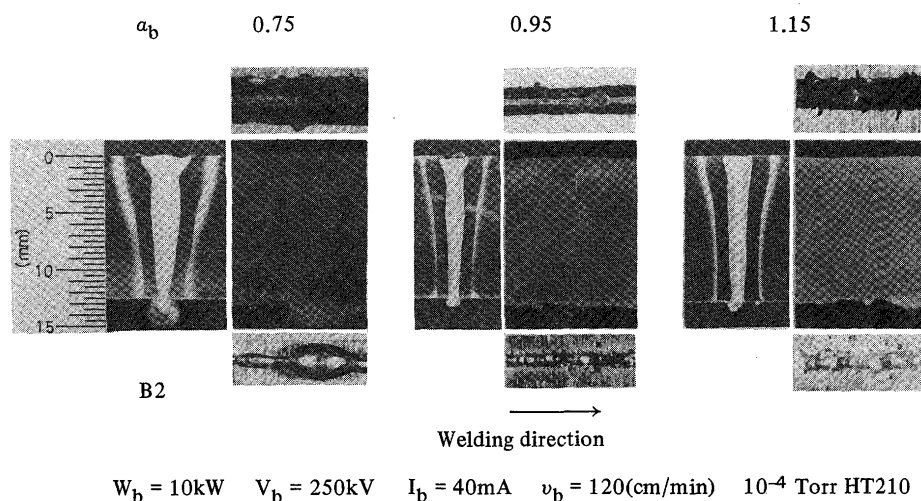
Fully penetrated bead cross sections and appearances of flat position weld metals at various α_b values
